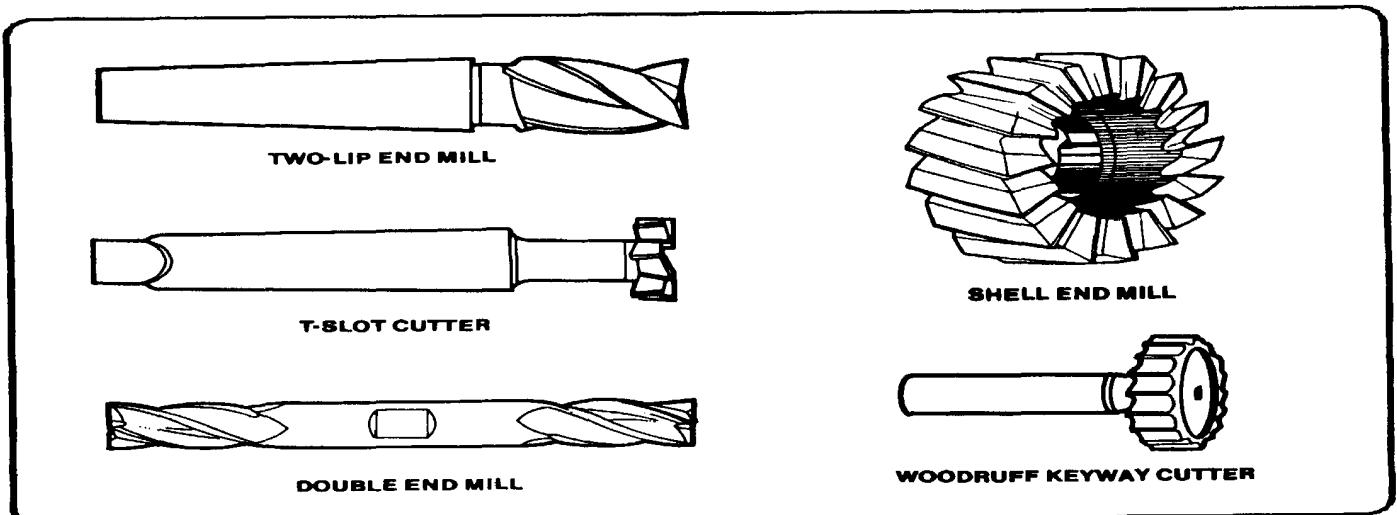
End mill, T-slot, and Woodruff keyway cutters.
